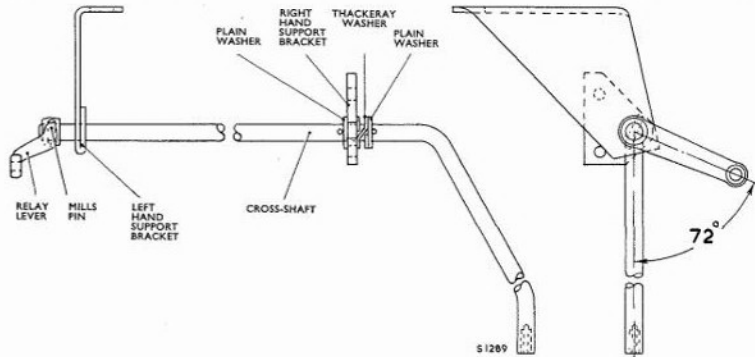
Accelerator cross-shaft arrangement, showing the angular disposition of the relay lever (L.H.D. Models)
